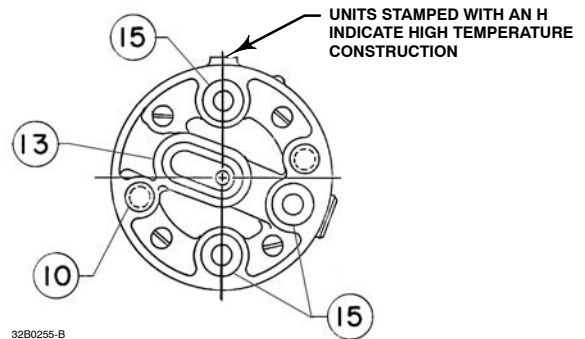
3582 and 3583 Series Positioners and Transmitters Assembly Drawing
